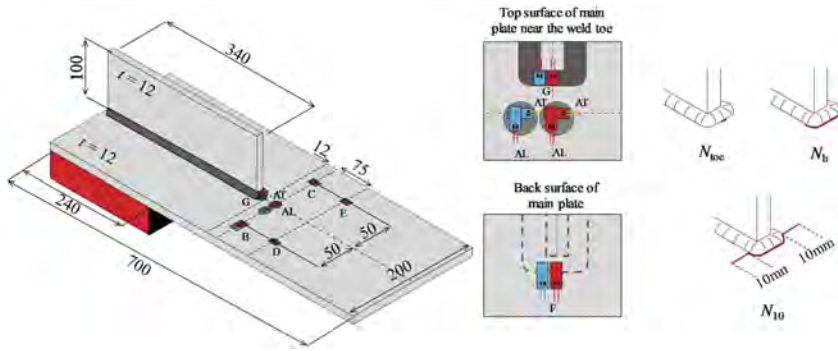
Out-of-plane gusset specimen, and definition of fatigue crack sizes.
